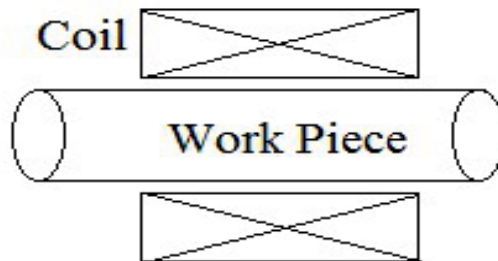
Magnetic Pulse Compression Welding
